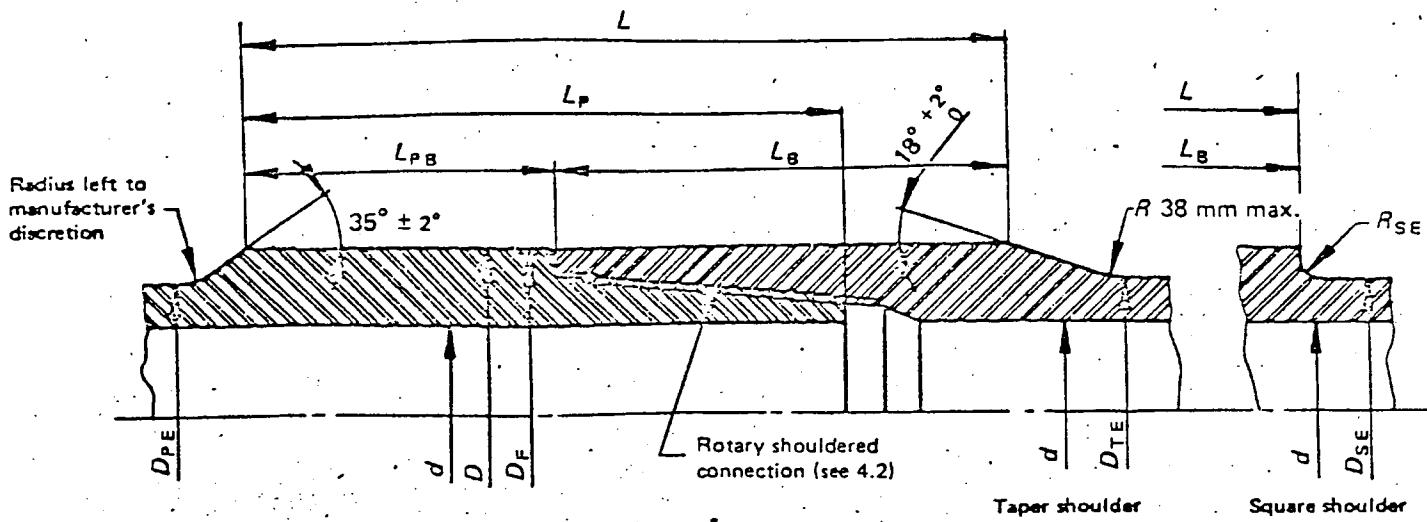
Tool joint — Taper shoulder and square shoulder (see table 1)
